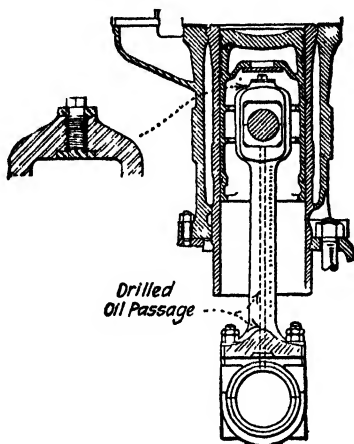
Busch-Sulzer Diesel connecting rod.
